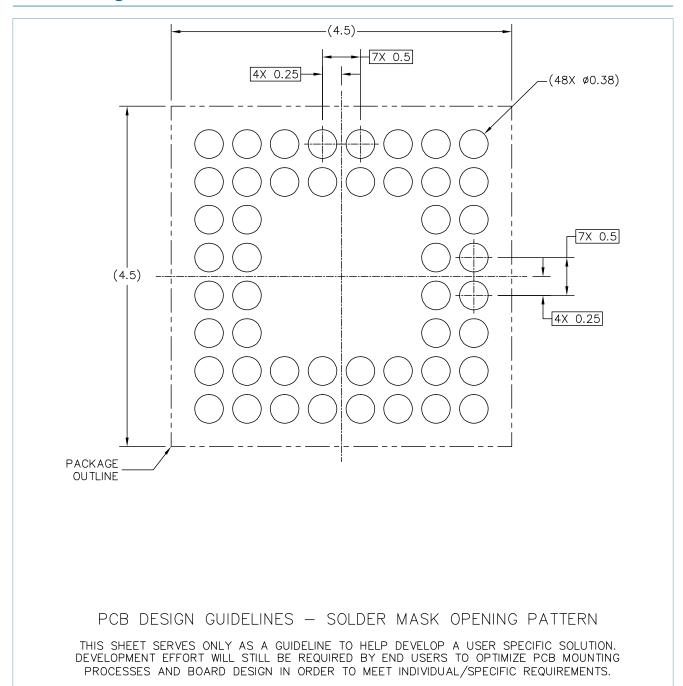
Reflow soldering footprint for TFBGA48 (SOT1155-1)
